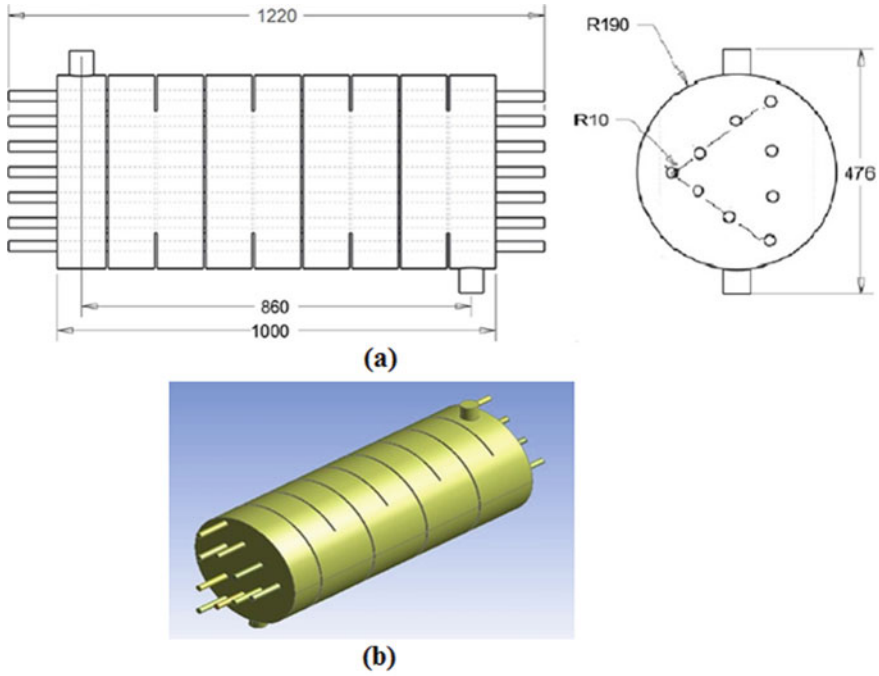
a Front view and side view, b 3D-view of STHE with triangular pattern
